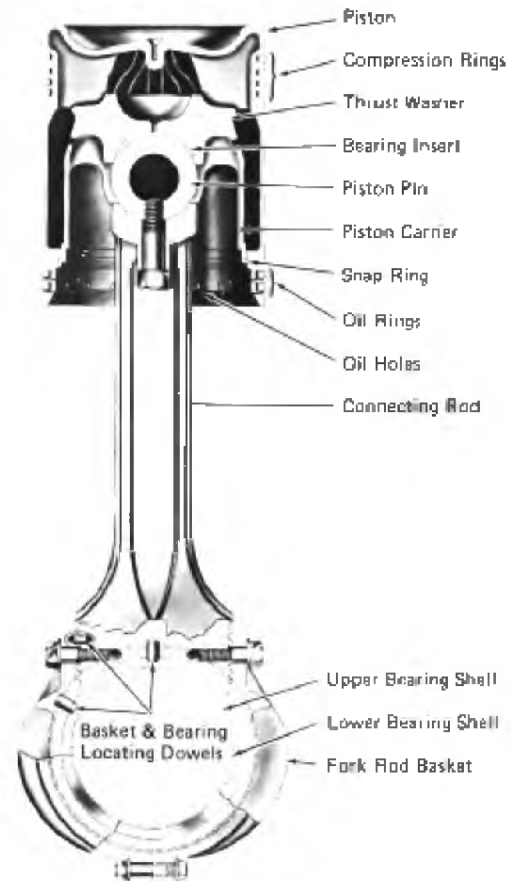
Piston And Connecting Rod Assembly, Cross-Section
